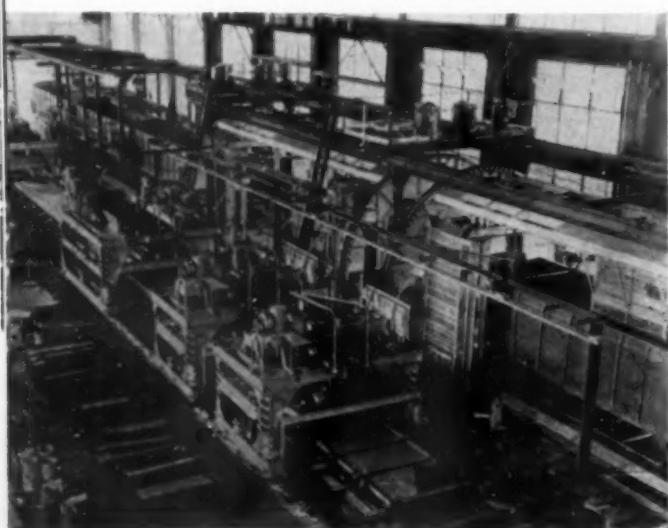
Manual and automatic welding are combined in fabrication of railroad cars on an assembly line, the product moving down a line from one welding station to the next. Side sheets and other sub-assemblies are welded at stations along the left side of the line which is visible in the background.
